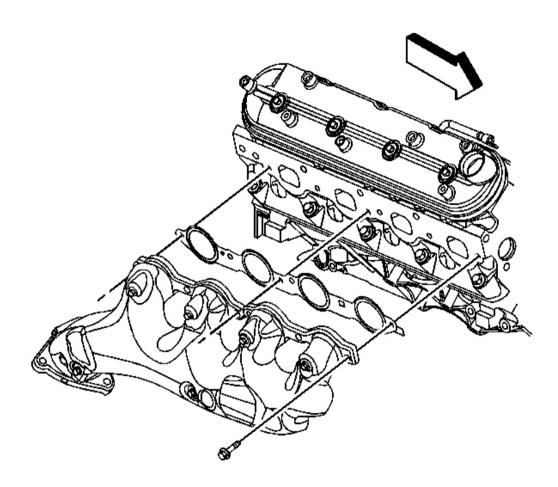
View Of Exhaust Manifold, Gasket & Bolts Courtesy of GENERAL MOTORS CORP.
